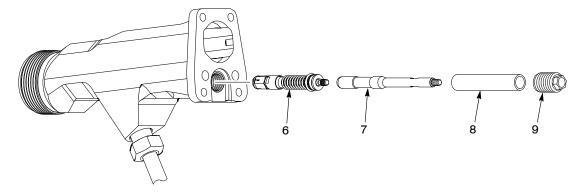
Packing Cartridge Replacement - Removing Cartridge From Extension and Pull Shaft
